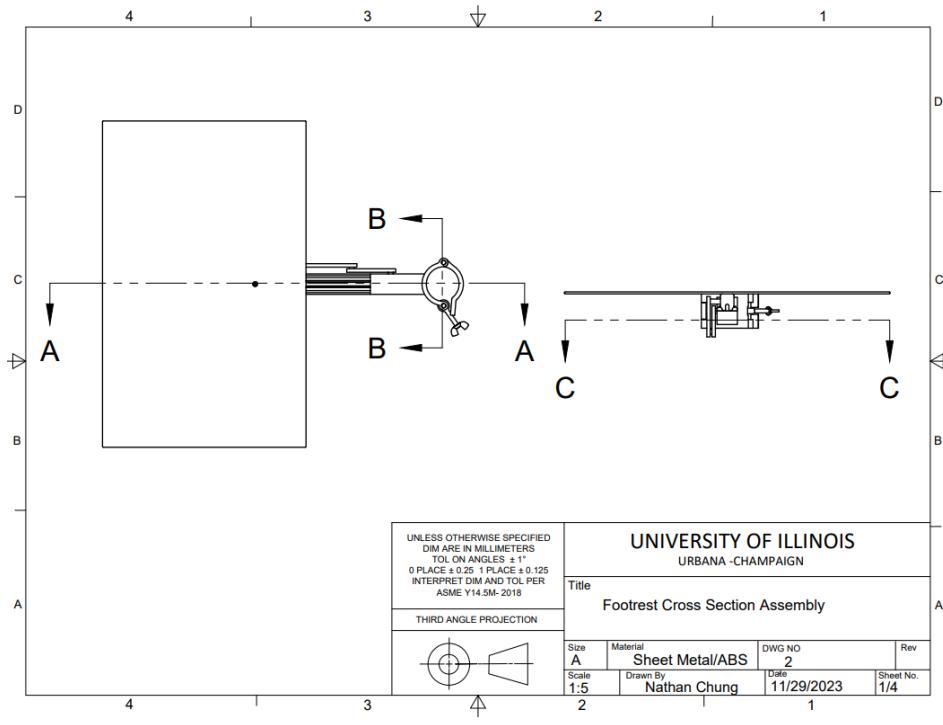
Footrest Cross Section Assembly Cutting Planes View Drawing
